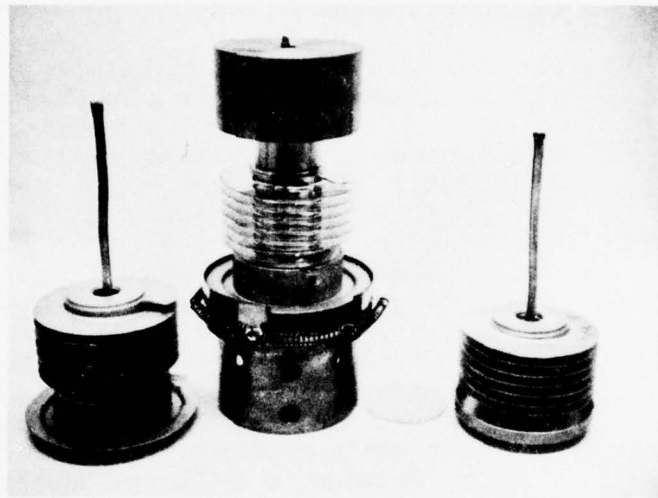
Soldering Fixture: The fixture shown positions the cathode heat-pipe with respect to the anode heat-pipe. The flanges on both heat-pipes are used as a reference. The inside diameter of the split ring which locates the two heat-pipes is machined slightly larger than the diameter of the silicon wafer. The spring wrapped around the split ring holds the fixture in place during soldering.
